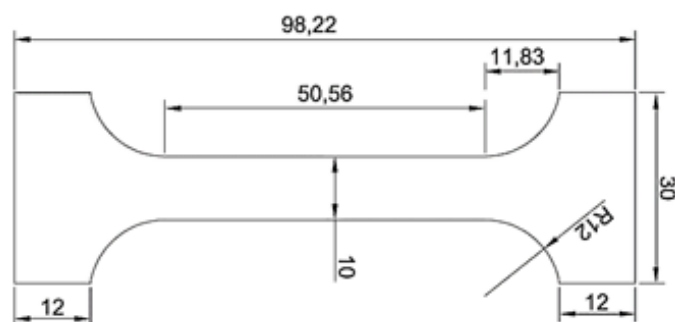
Shape and dimensions of the test body for tensile strength measurement.
